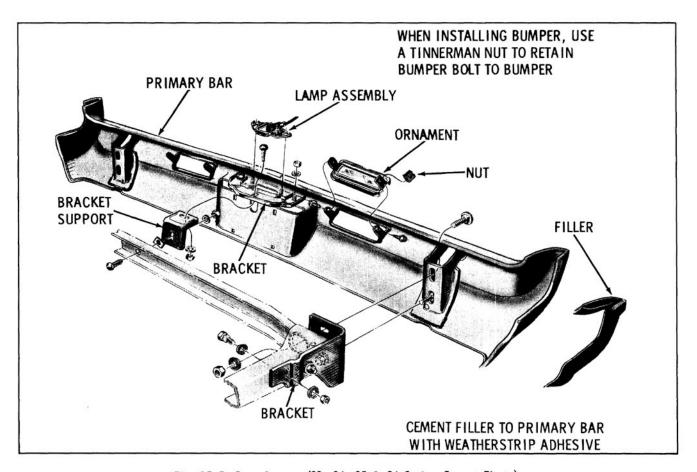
Rear Bumper (33, 34, 35 & 36 Series, Except Fiesta)
